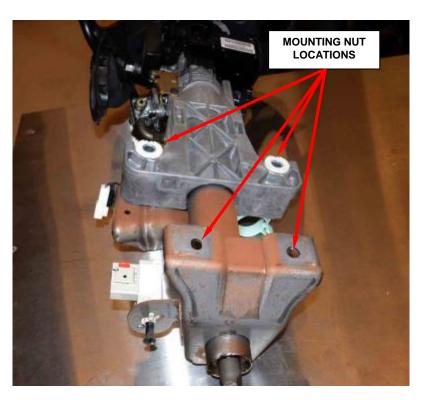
Steering Column Mounting (Column Removed for Photographic Purposes)
